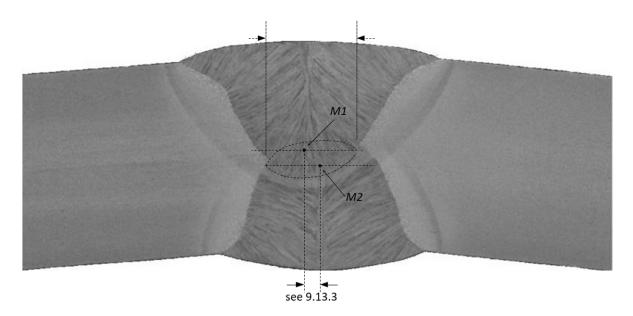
Dimensional Deviations of the Weld Seam d) Misalignment of Weld Beads of SAW Pipe
